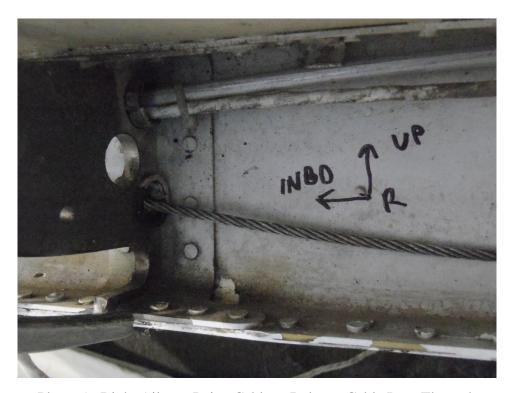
Right Aileron Drive Cable at Balance Cable Pass-Through
